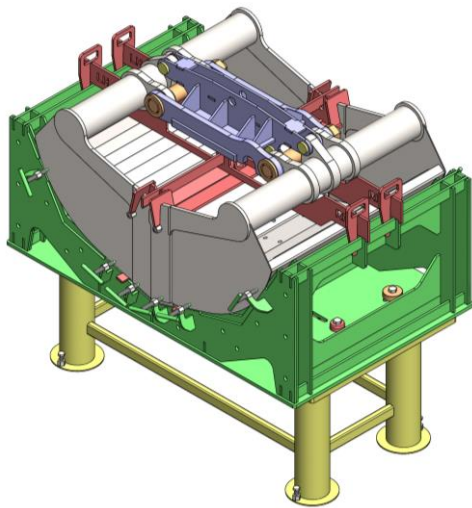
Fixture for assembling a 1000 mm grapple bucket.
